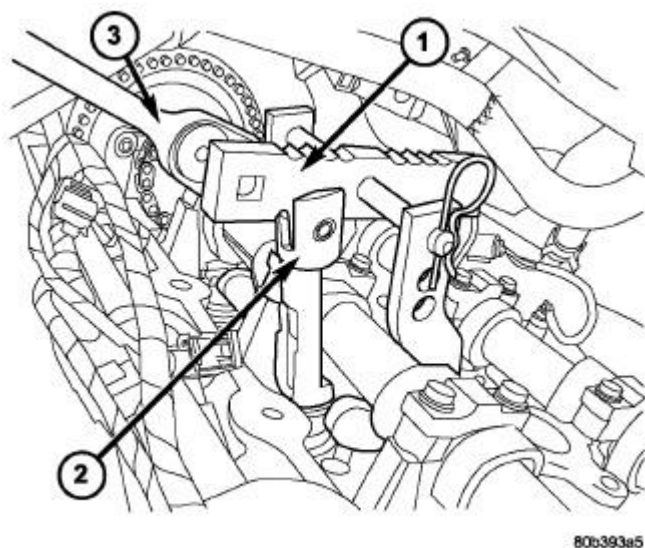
Rocker Arm - Removal/Installation - 2.7L
